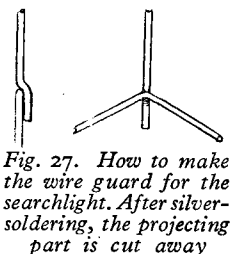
How to make the wire guard for the searchlight. After silver-soldering, the projecting part is cut away
